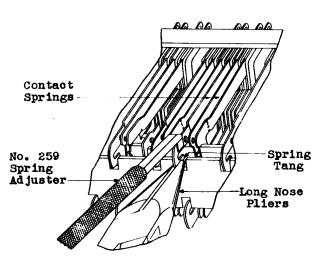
Method of Adjusting Spring Tang for Contact Separation
